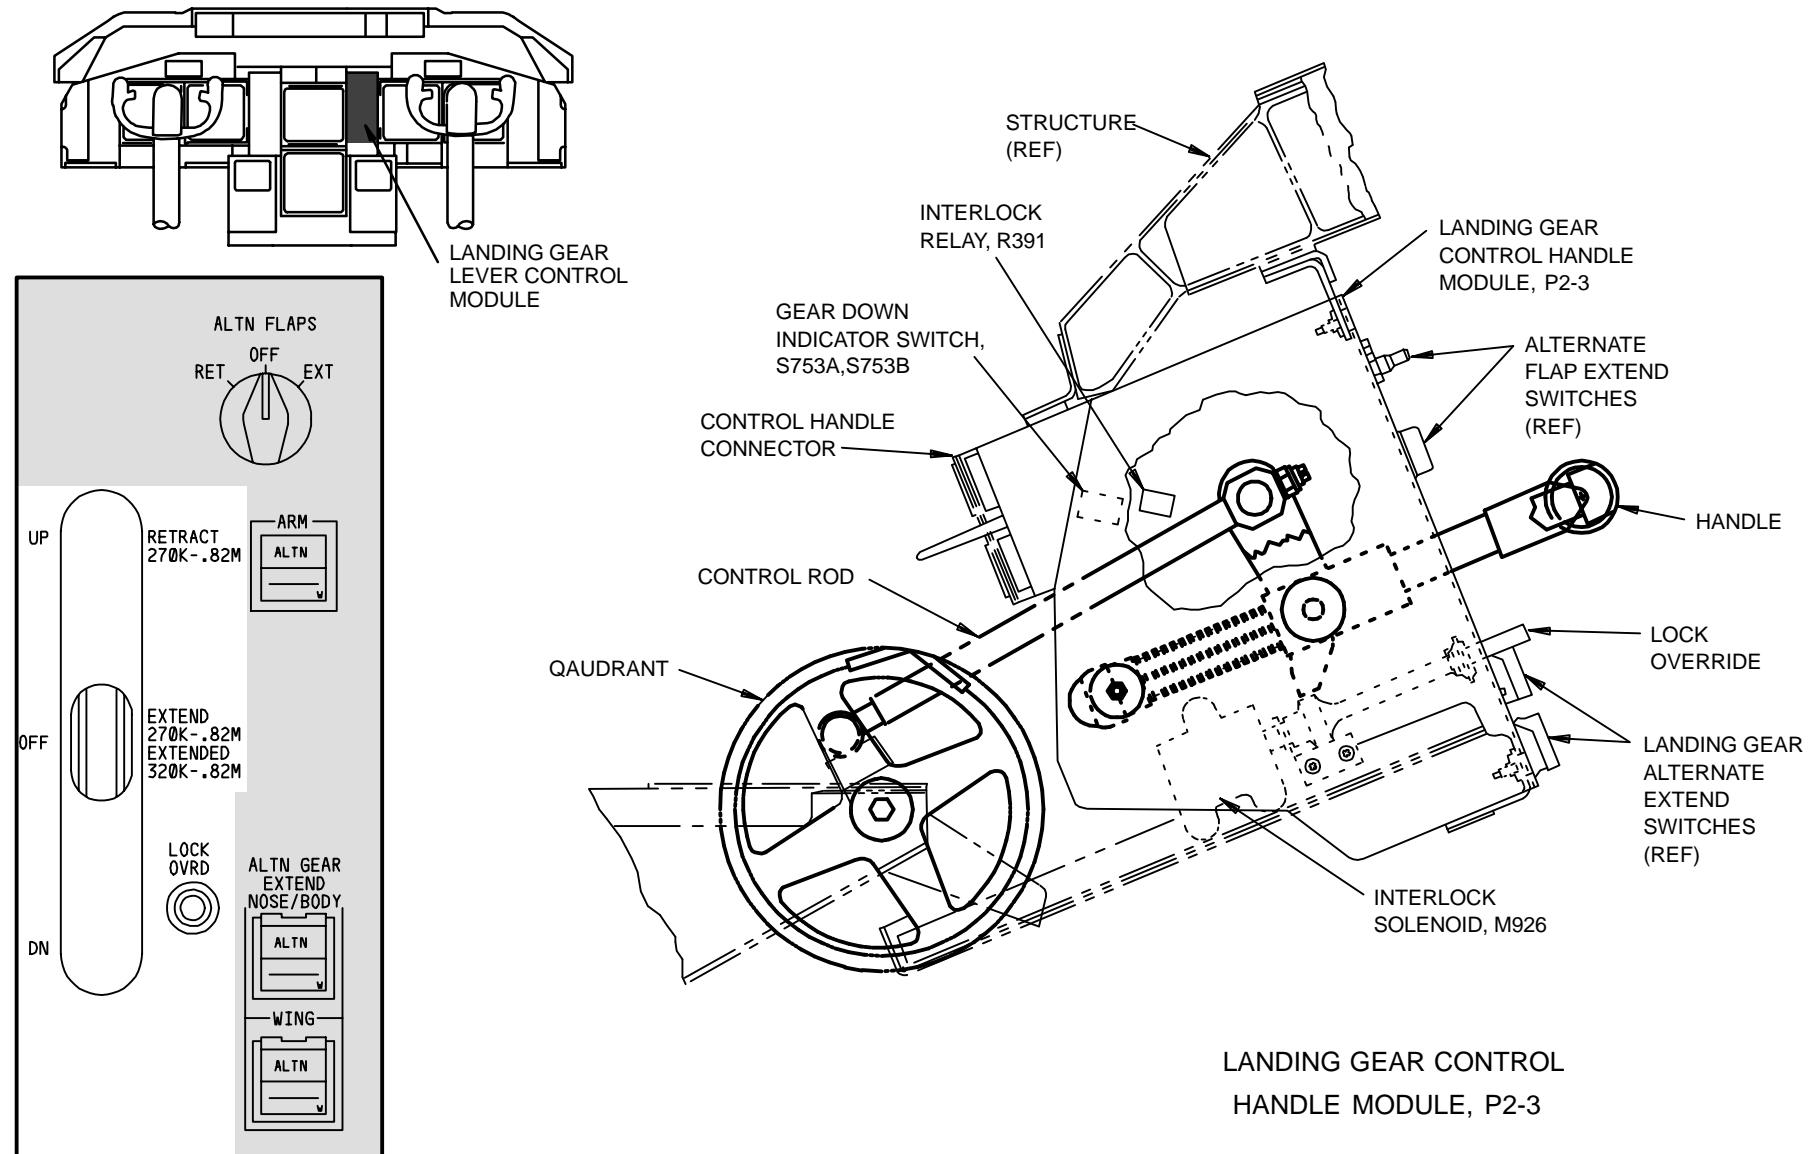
LANDING GEAR CONTROL SYSTEM HANDLE
